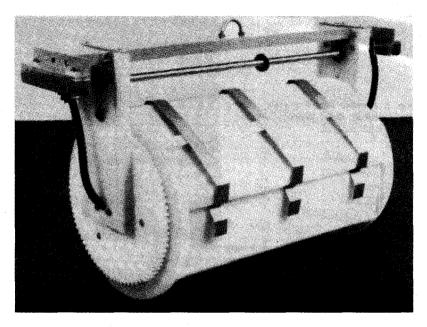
Typical horizontal barrel and superstructure assembly showing inverted V-type contacts.
